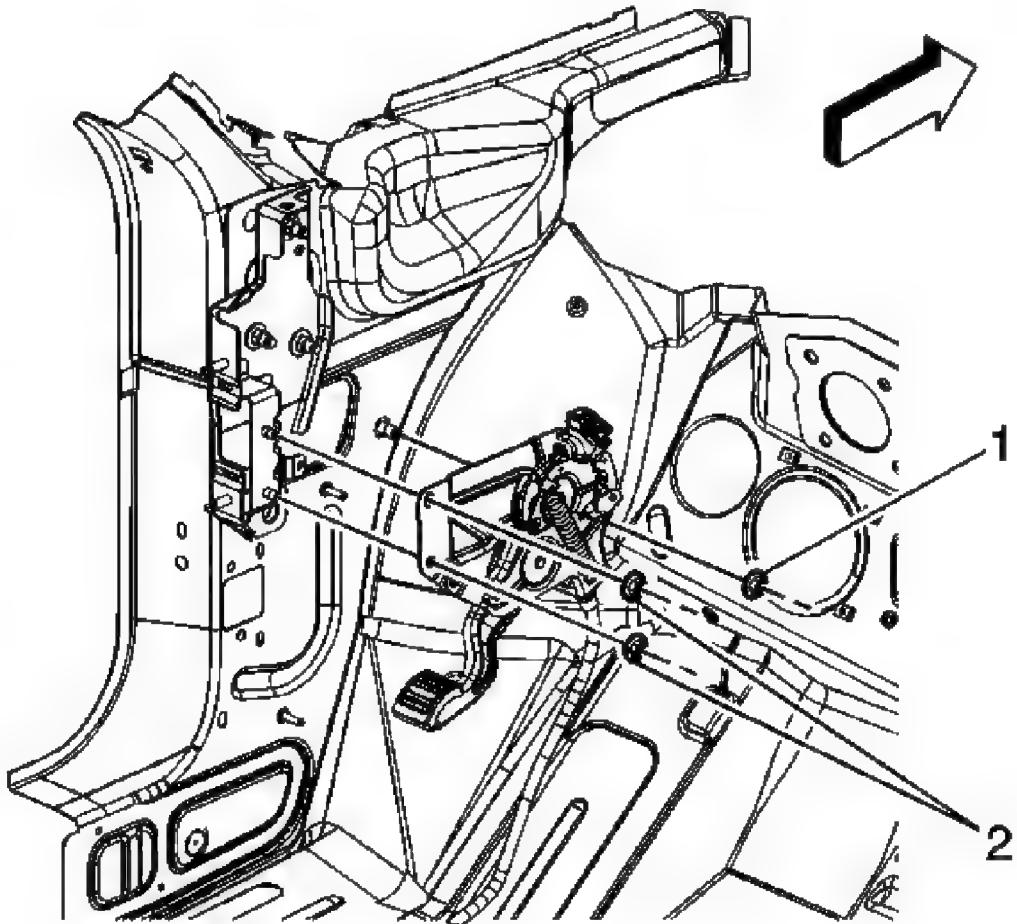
Park Brake Pedal Assembly Mounting Nuts
